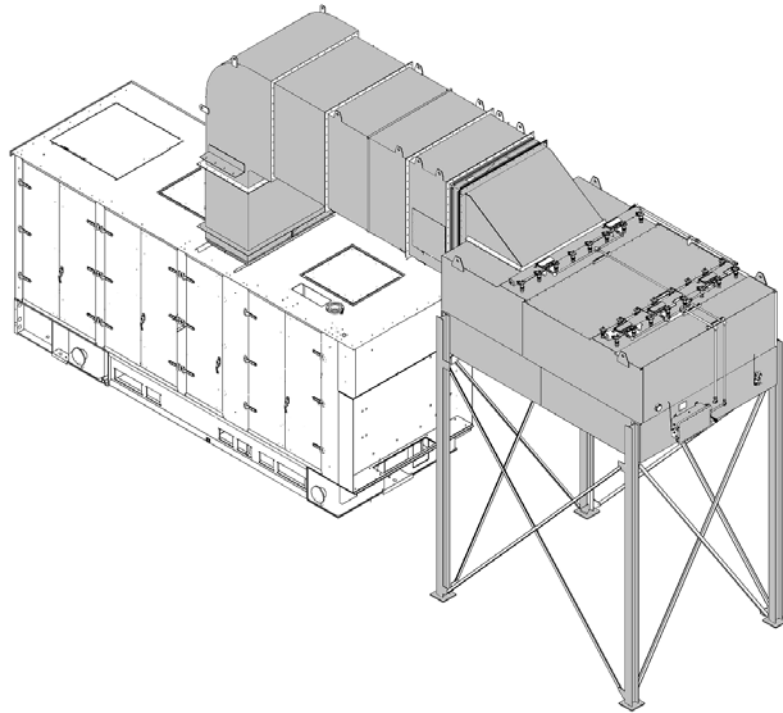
Taurus 70 Mechanical Drive Package with Barrier Type Inlet Air Filter
